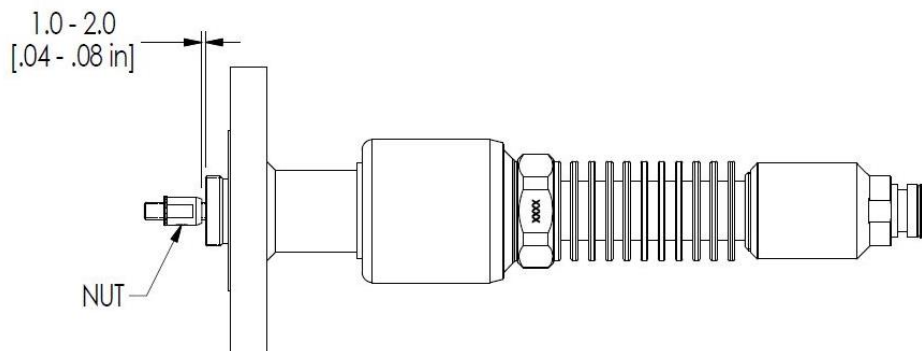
SLG726 flanged process connection, probe nut installation position, mm [in]
